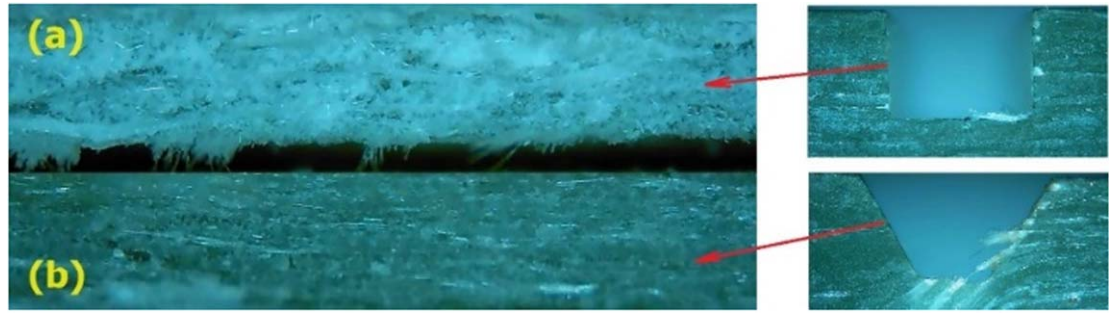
Images of side surfaces of the adhesion for unpatched specimens; (a) U- and (b) V-shaped scratches.
